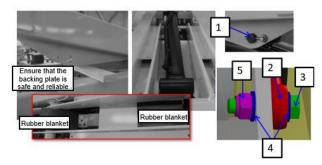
Installation of third layer upper cylinder (lower end)
